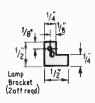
Two of these aluminium brackets are required to mount the dial lamps
